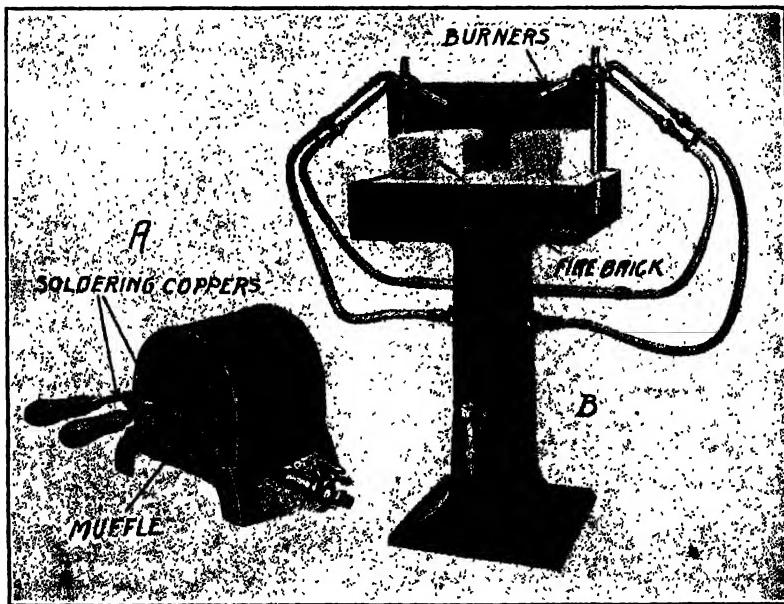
Furnace Used for Heating Soldering Coppers at A and Efficient Brazing Forge at B.
